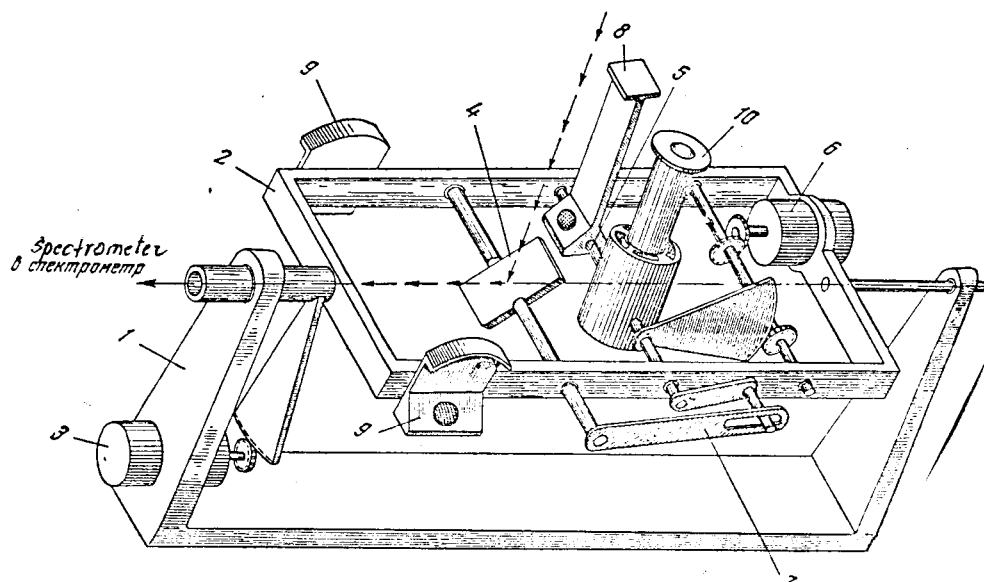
Constructive-kinematic layout of the layout of the tracking head.
